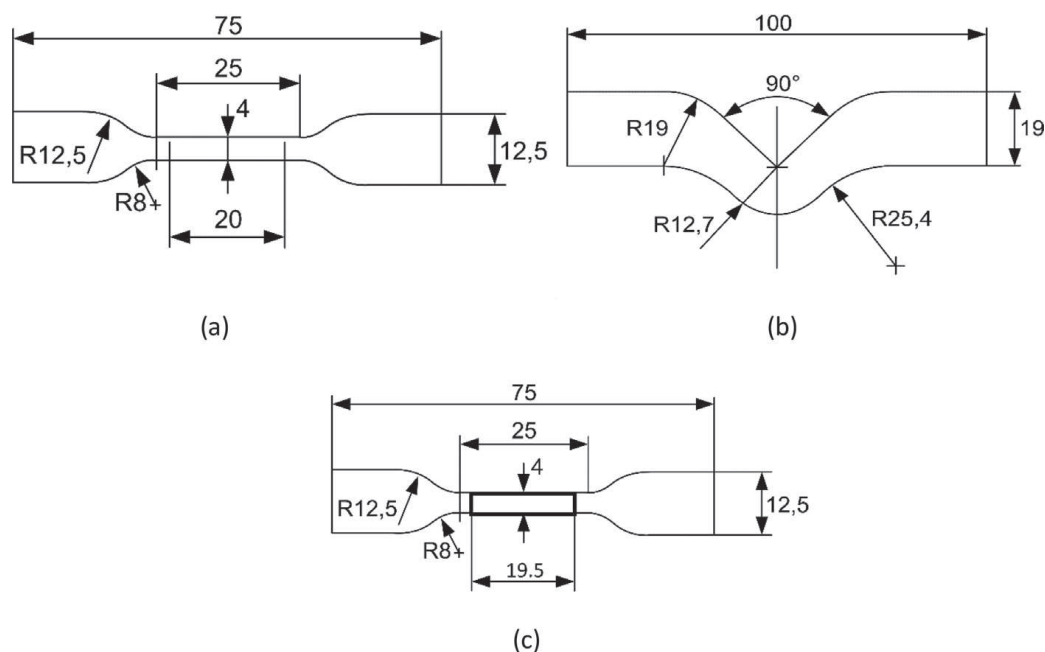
Test specimens and their dimensions in mm; (a) Tensile test specimen (according to DIN 53504) (b) angle specimen with incision (according to DIN ISO 34-1) (c) DMA specimen (used area is highlighted).
